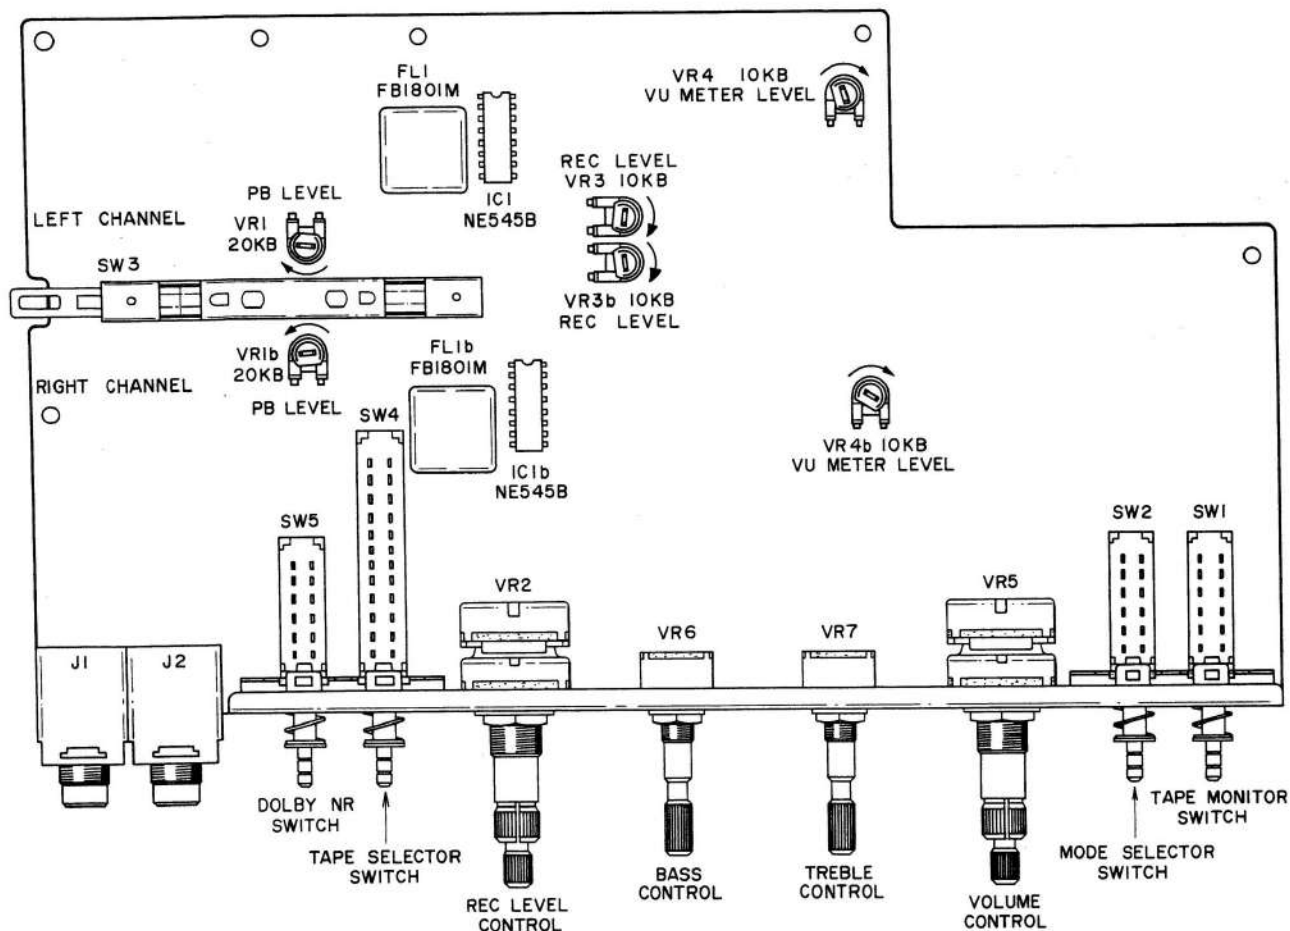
Tone Control & Rec/PB P.C Board (AC-3501A) Adjustment
